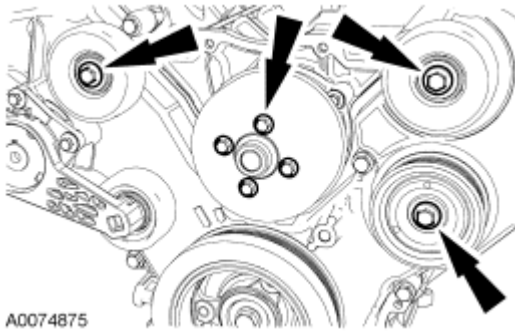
Locating Coolant Pump Pulley And Accessory Drive Belt Idler Pulley Bolts
